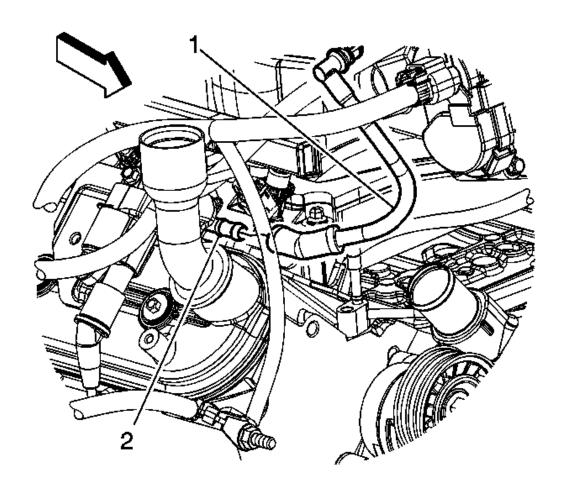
View Of PCV Tube & Right Valve Rocker Arm Cover Fitting Courtesy of GENERAL MOTORS CORP.
